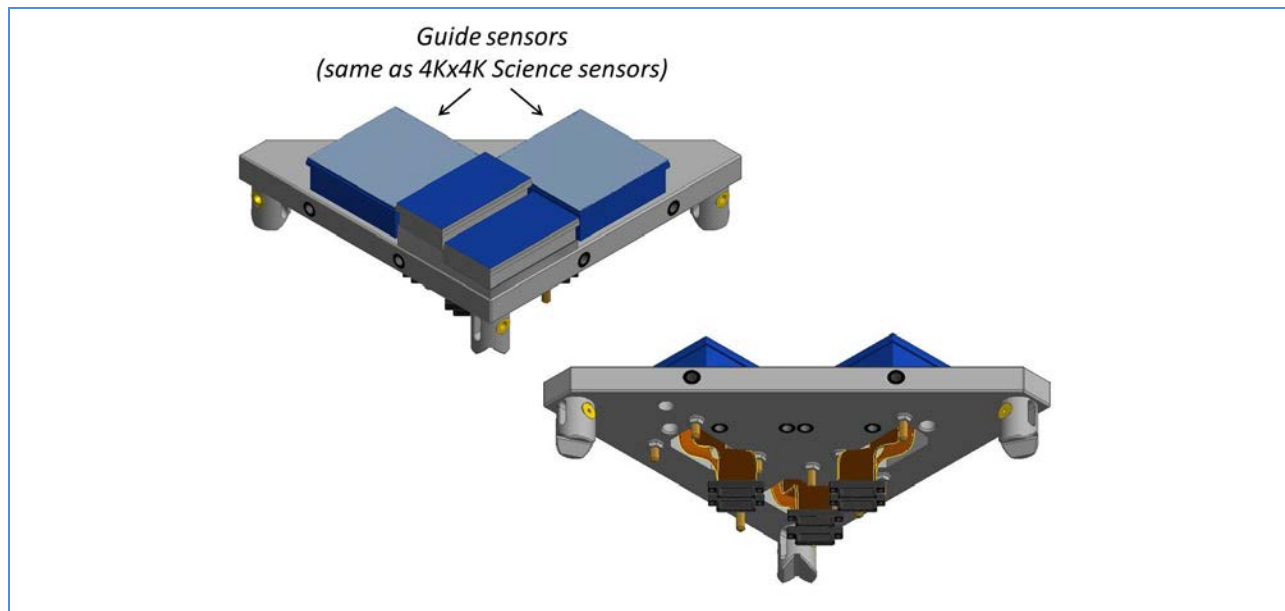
Guide and wavefront sensor assemblies on the corner raft
